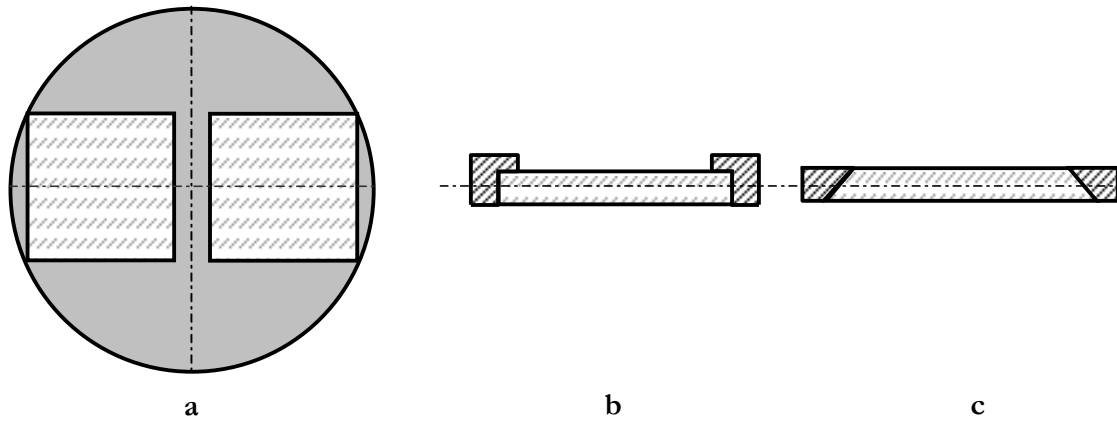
a - specimens placement on the turntable b - old lateral fastening variant c - new lateral fastening variant
